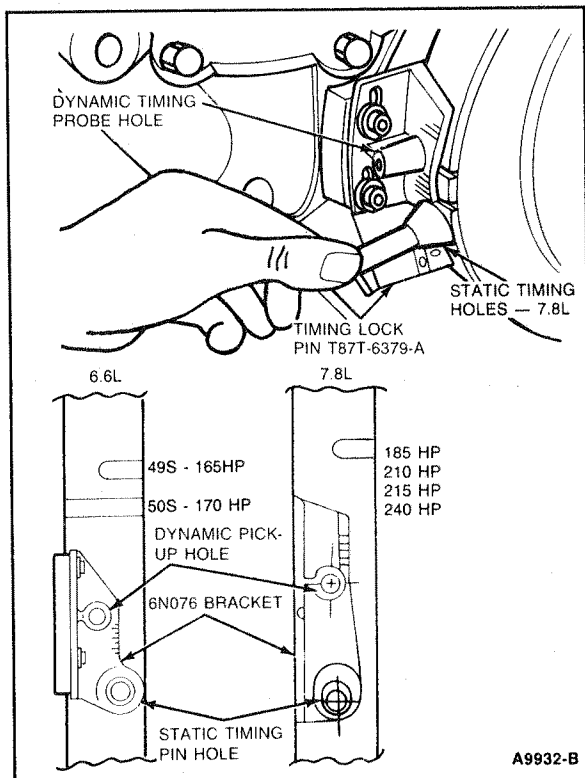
Fitting Timing Pin Into Crankshaft Damper
